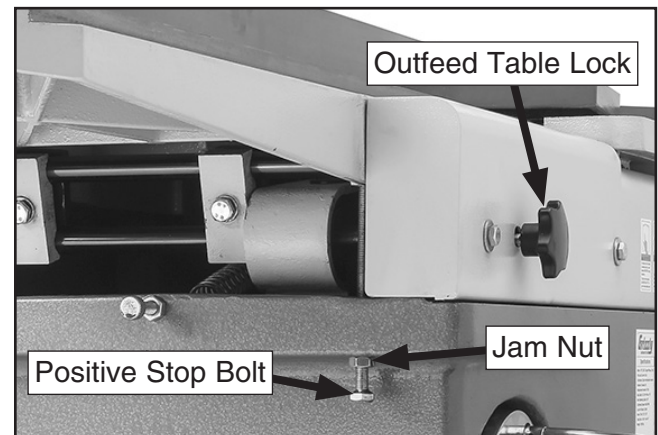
Location of outfeed table lock, positive stop bolt, and jam nut.
